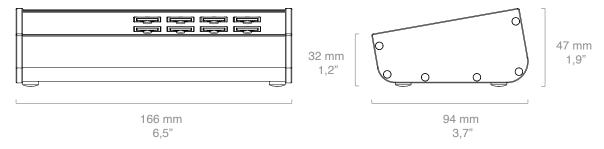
Technical drawing of Tally Box with key dimensions and layout details.
